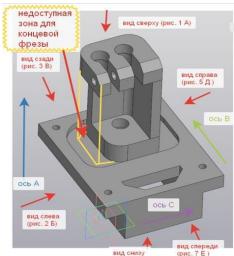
3D model of the blank indicating the inaccessible zone for the end mill during processing
